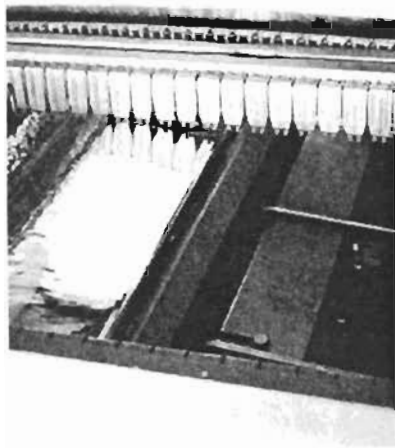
Oscillatory action, supported asymmetrical or omega wave soldering machine, showing molten solder flowing (Speedline Electrovert)
